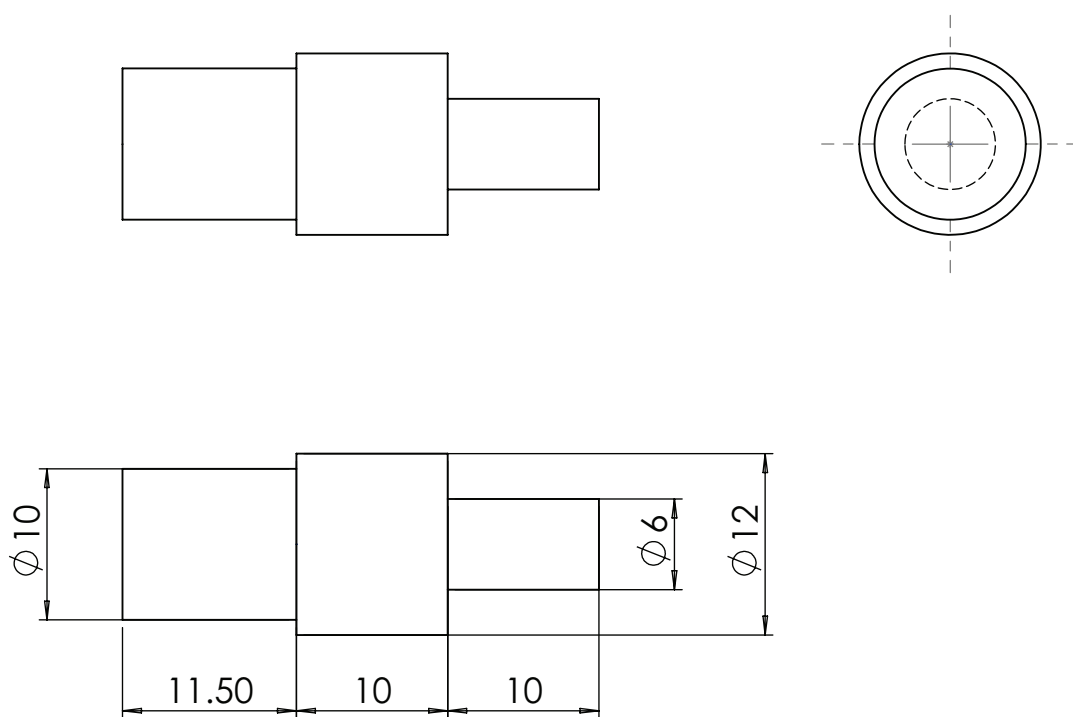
Axis 2 in the lens frame assembly of Fig.A.1.
